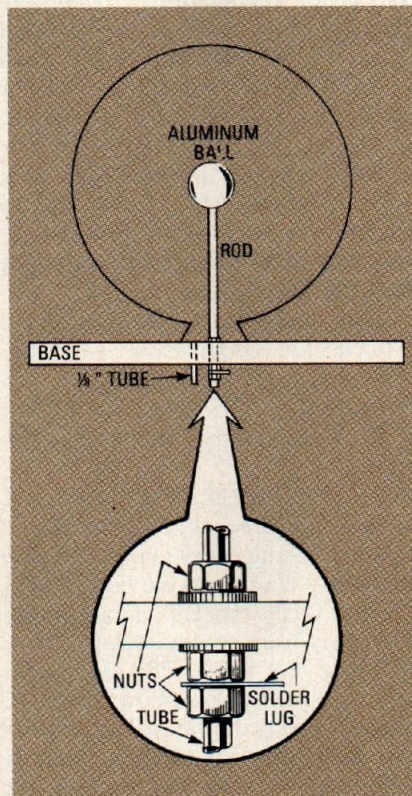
ASSEMBLY DETAILS for mounting the globe on the Corian base. Take extra care to ensure that the epoxy cement seals the rod and the tubing to the base.
